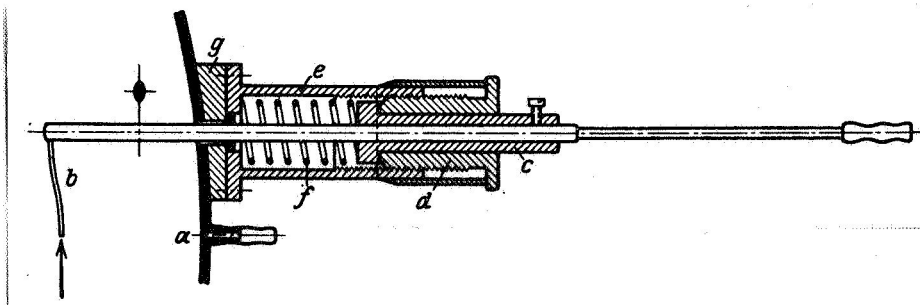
Pressure measuring connection on the chamber wall (a) and pitot tube (b) with operating mechanism (pitot tube Holder, c; Threaded Spindle, d; Casing, e; Spring, f; base, g.)
